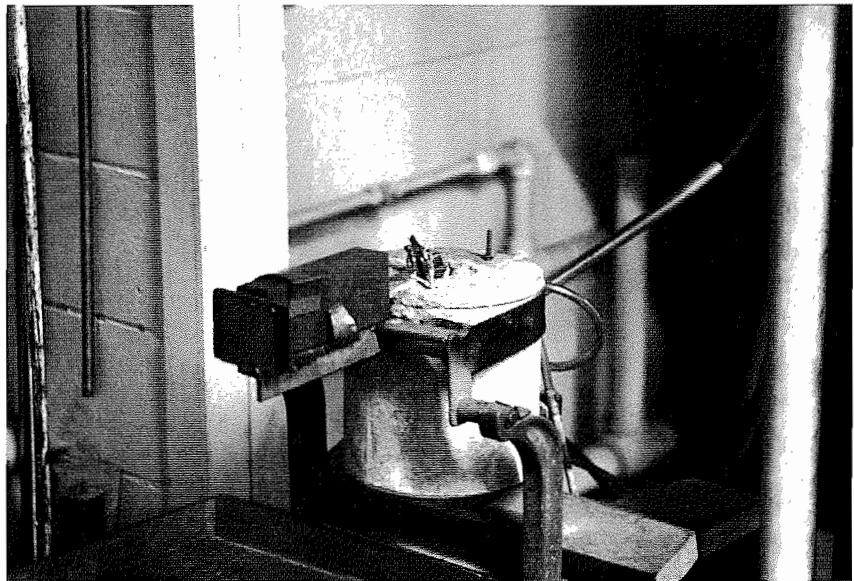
Durville process for melting platinum and pouring into ingot molds. Entire assembly rotates crucible and mold for continuous pour.
